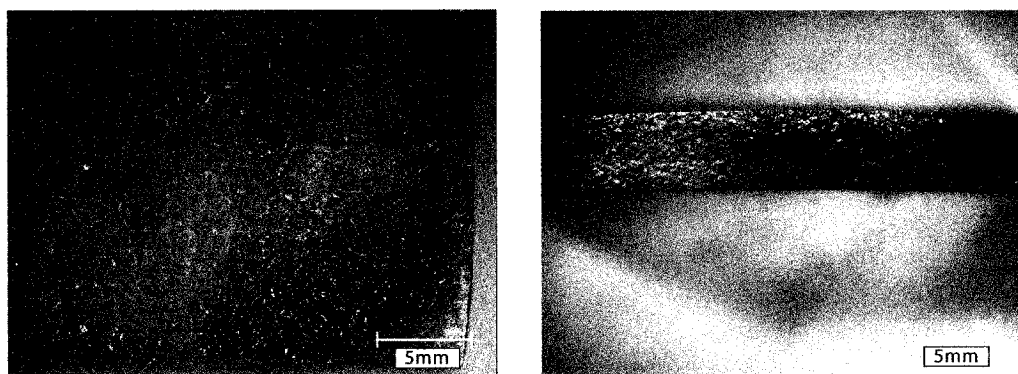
Mg-3Al-1Zn sample rolled for 7 passes at 150°C showing a smooth (a) rolled surface and smooth (b) rolled cross-section.
